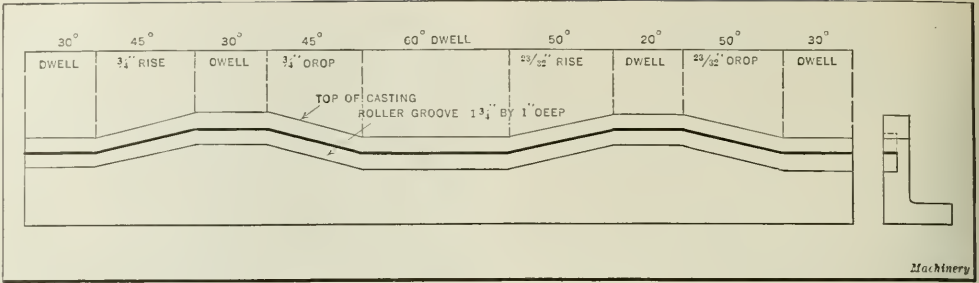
Lay-out for Large Cam, which was cut on a 48-inch Boring Mill
